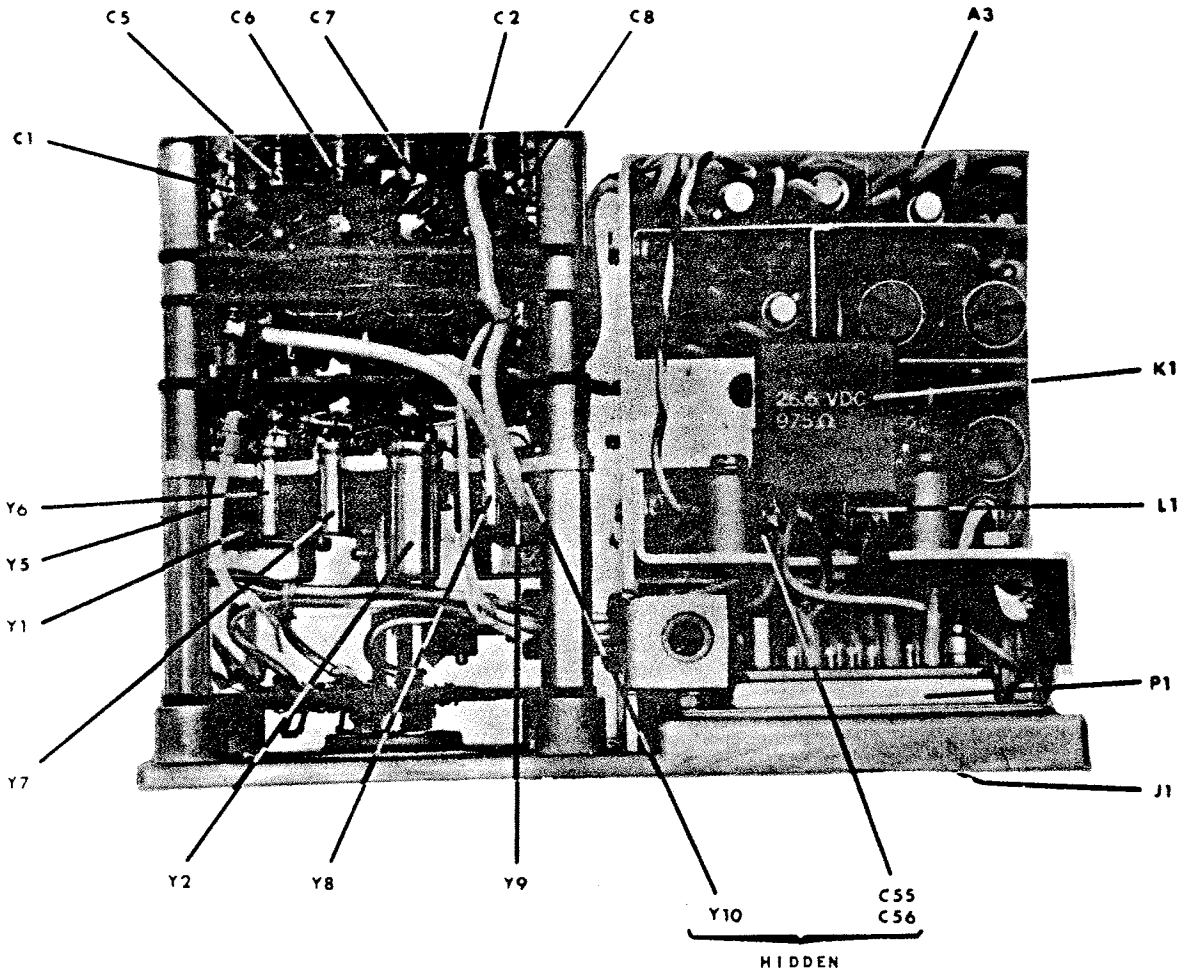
Translator/Synthesizer Electronic Assembly, Bottom View, Component Location
